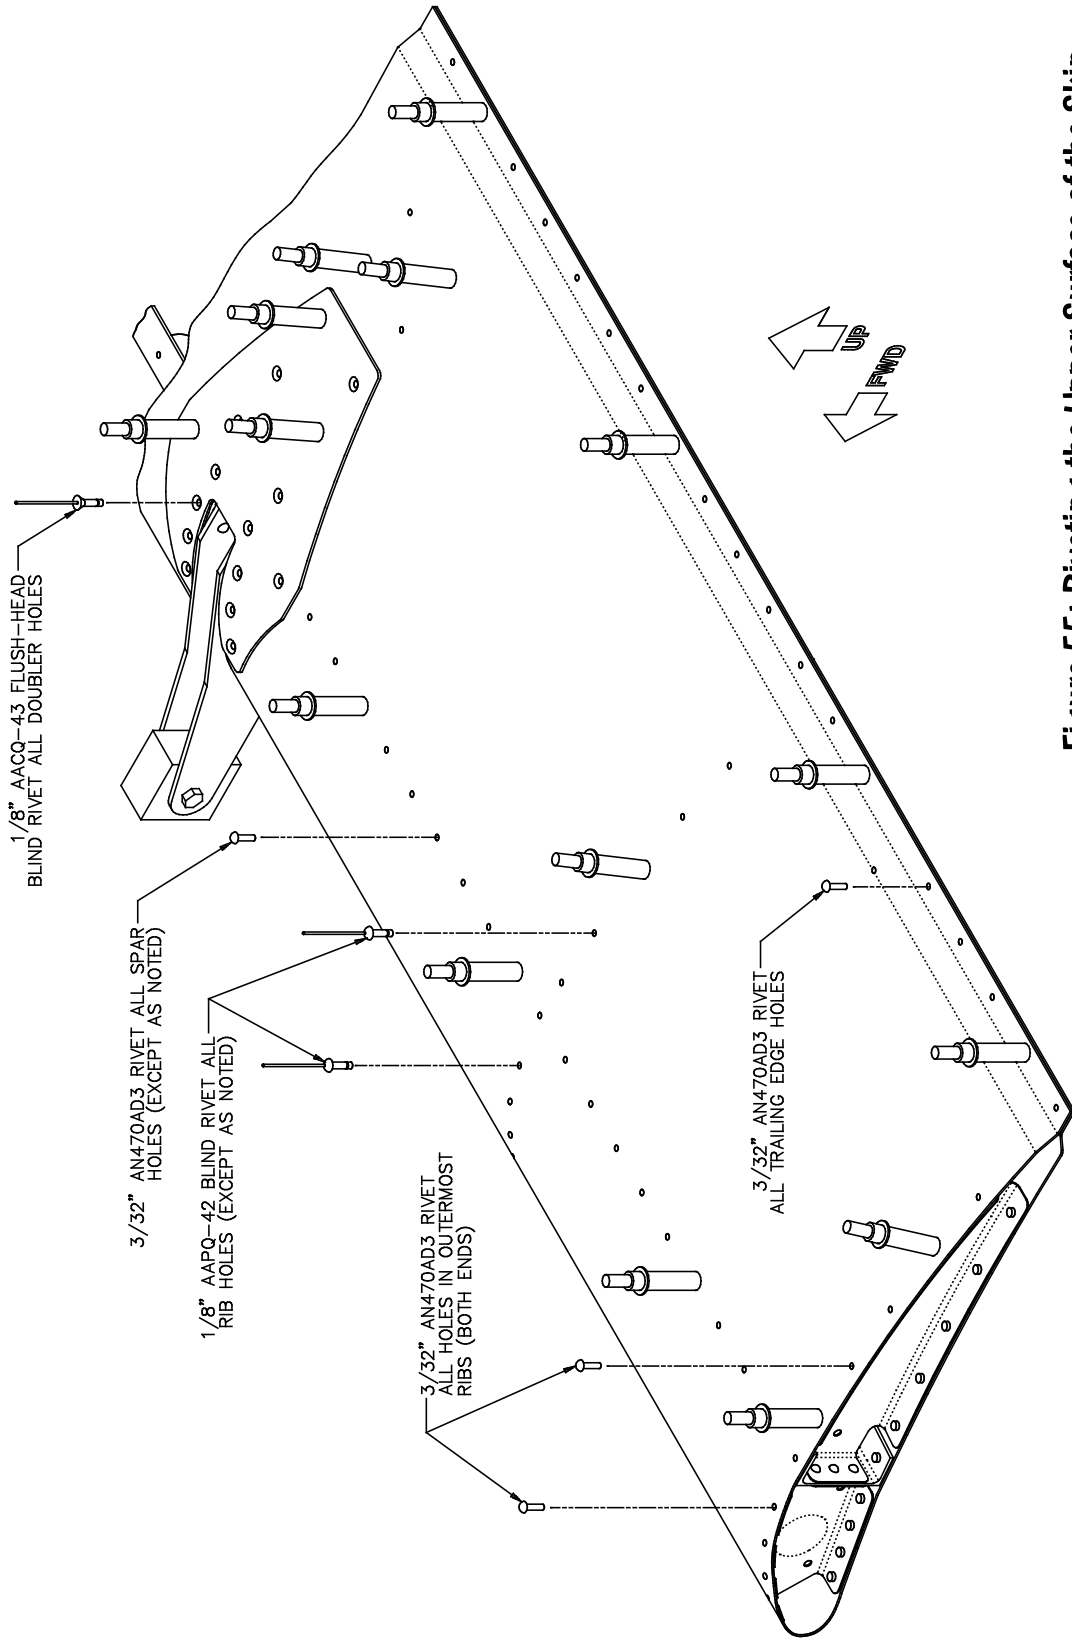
Riveting the Upper Surface of the Skin to the Spar/Rib Assembly
